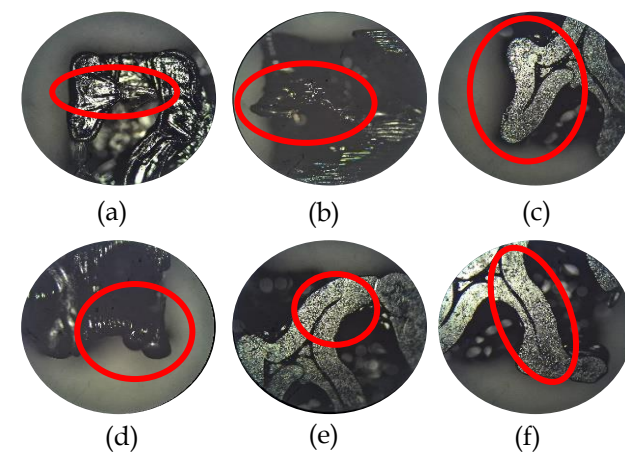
Test 5; P.S.-30 mm/s, R.S.- 40 mm/s; (a) String; (b) Layer shift; (c) Shape deformation; (d) Excessive material; (e) Voids; (f) Nonuniform layer width.
